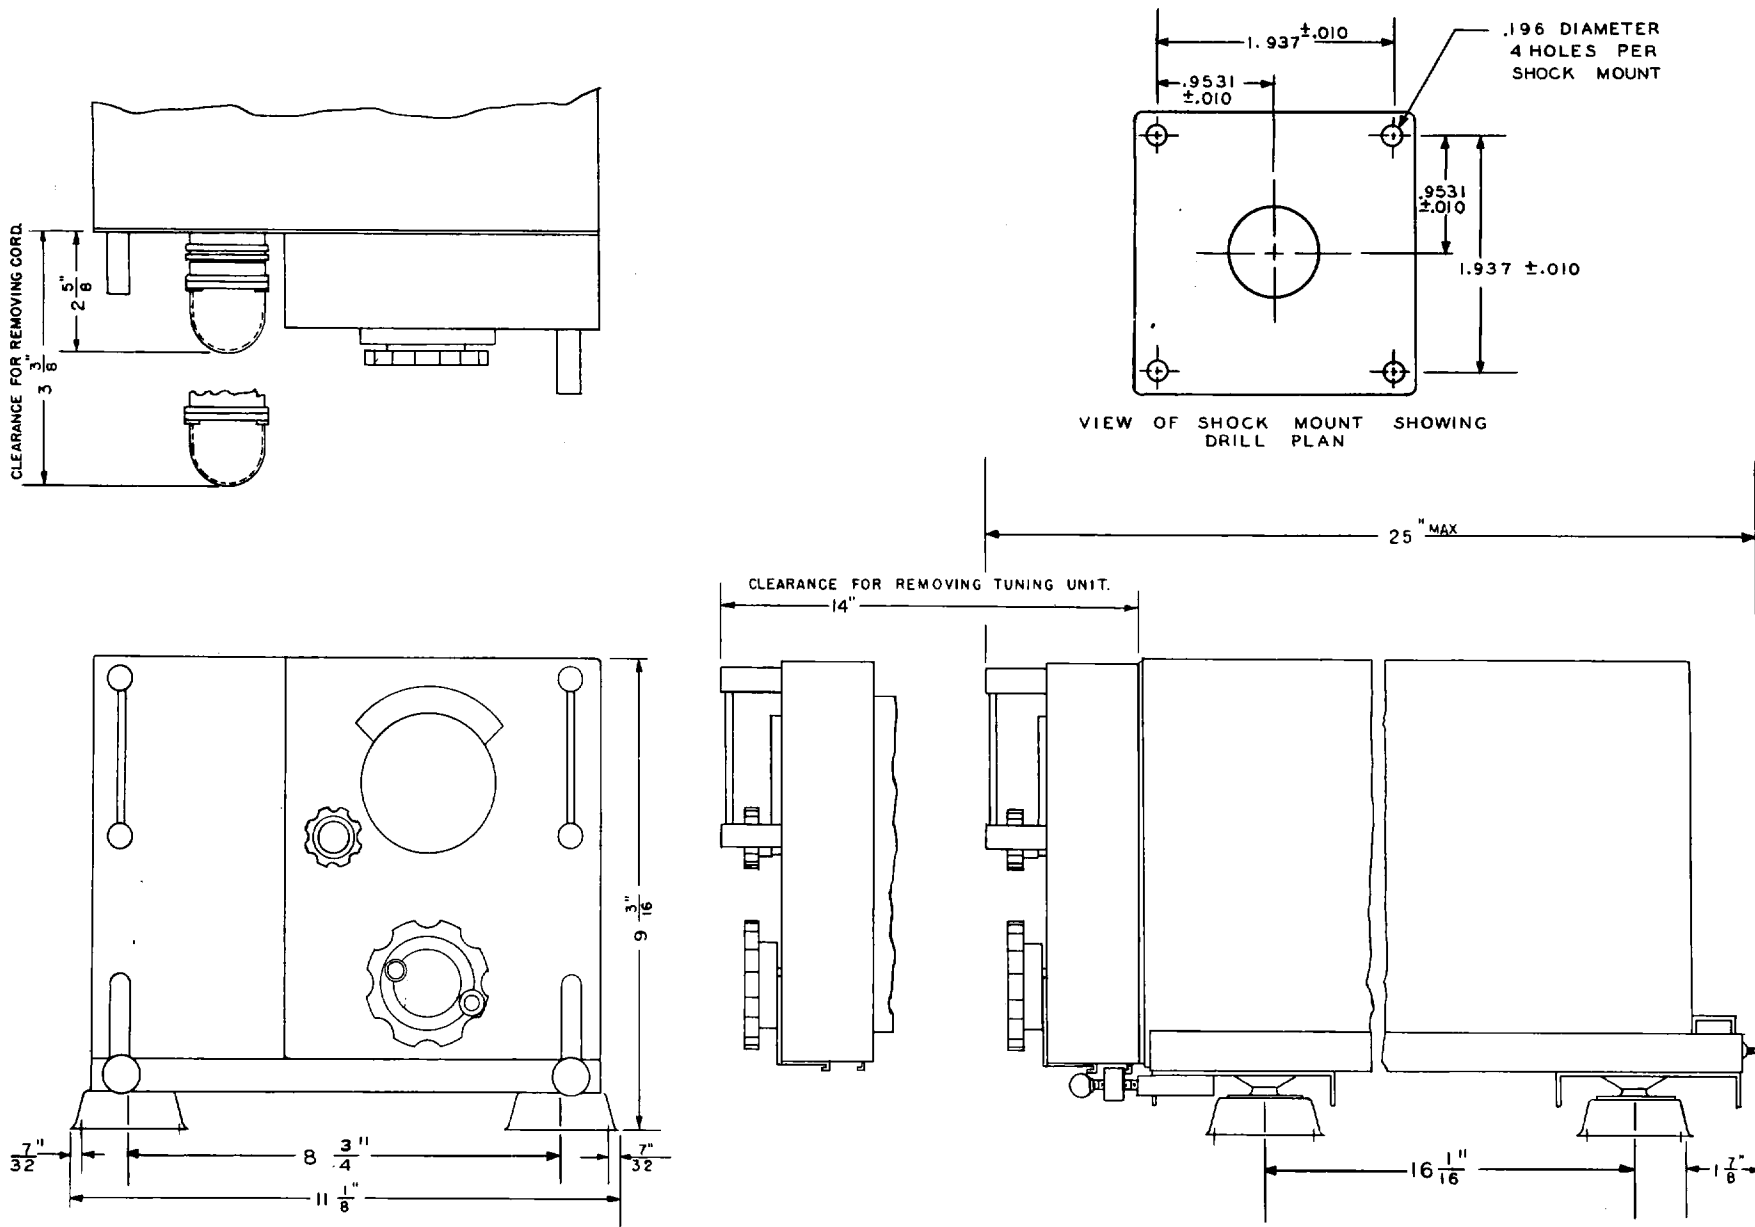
Receiving Equipment AN/APR-4—Mounting Dimensions
